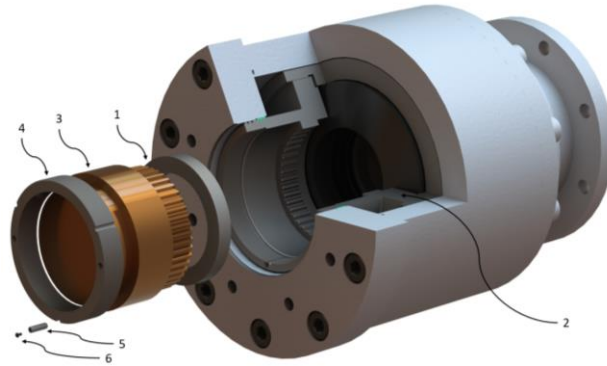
RT/RTC Drive Nut Installation, Uninstalled Thrust Washer
